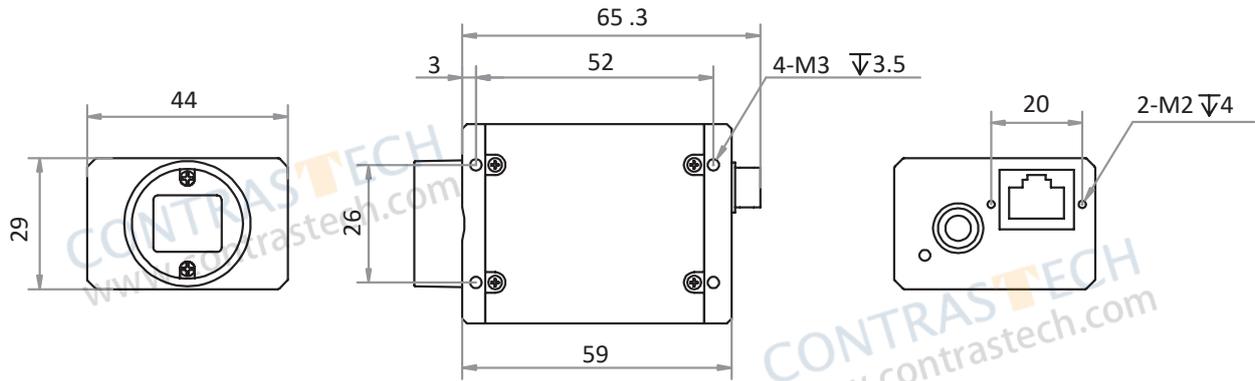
Mechanical Dimensions of the C-mount GigE Cameras with 29 \* 44 \* 59 mm housing (The installation uses M3.5 screws).
